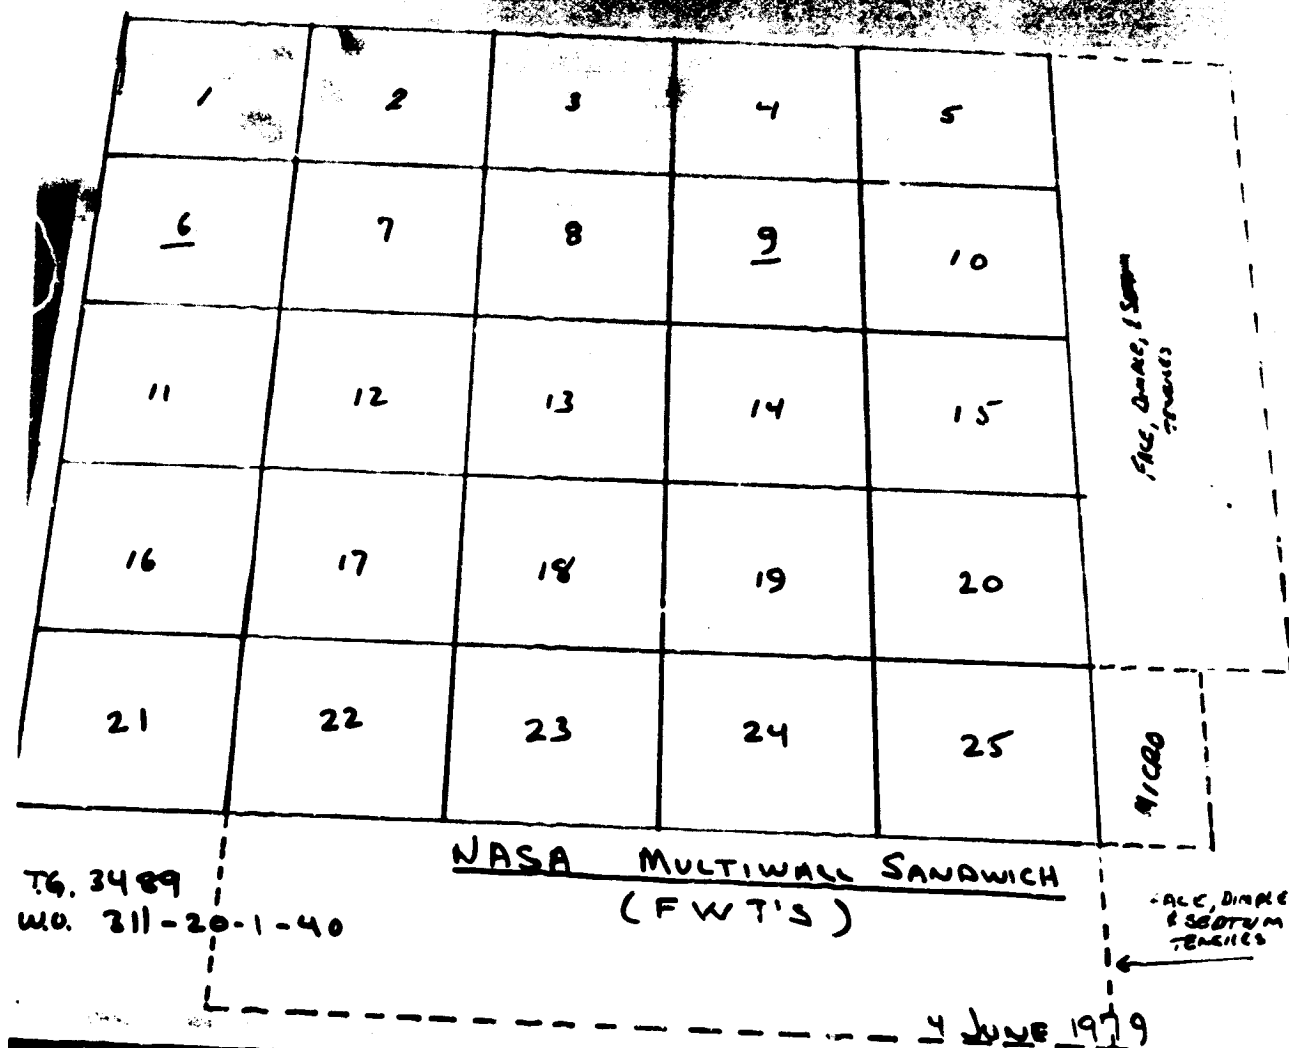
Beam Flexure Test Specimen Layout for Cutting Flatwise Face Tension, Tensile and Micro Specimens
